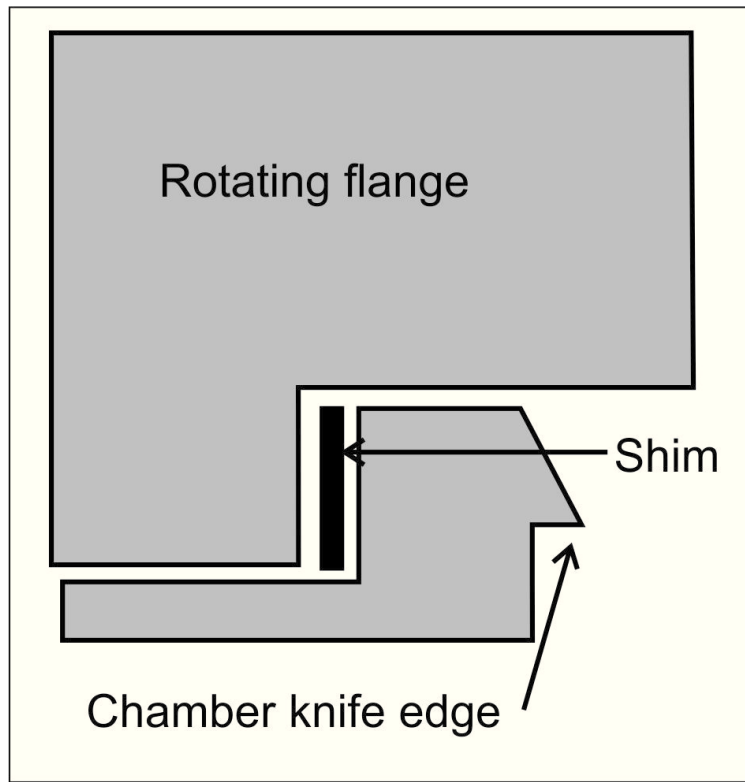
Sketch of the shim under the rotating flange on the vacuum chamber.
